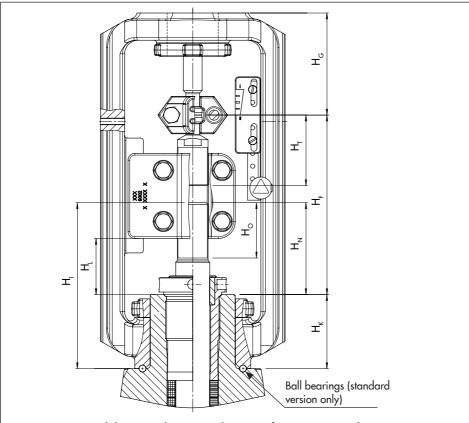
Dimensional drawing with mounting dimensions for Types 3271 and 3277 Pneumatic Actuators
